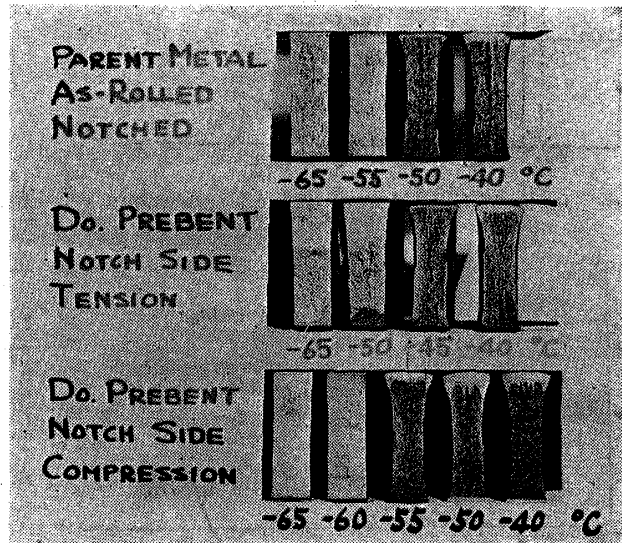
Fracture appearance of specimens tested (1)~(3)
